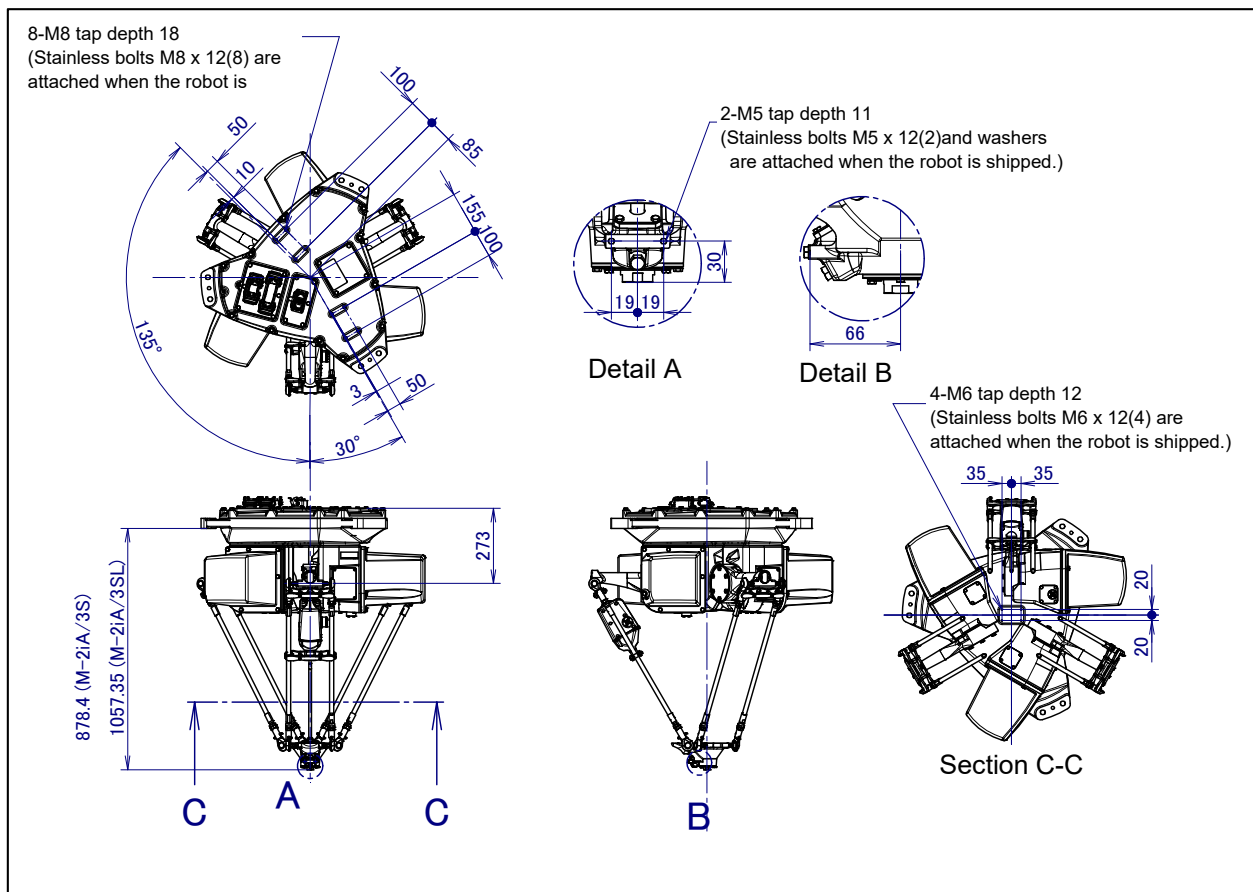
(a) Equipment mounting faces (M-2iA/3S/3SL)
